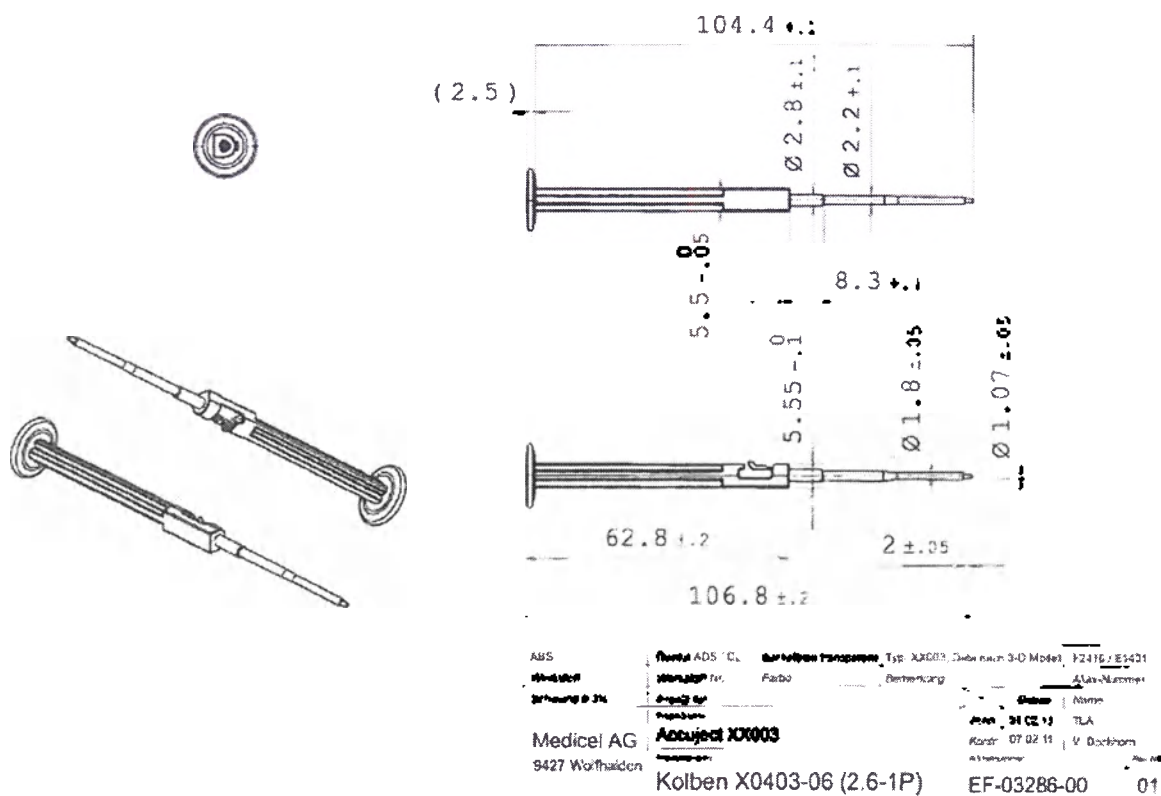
Original manufacturing drawing of the Plunger of IOL Injector, INJ100 (dimensions are introduced in millimeters).
